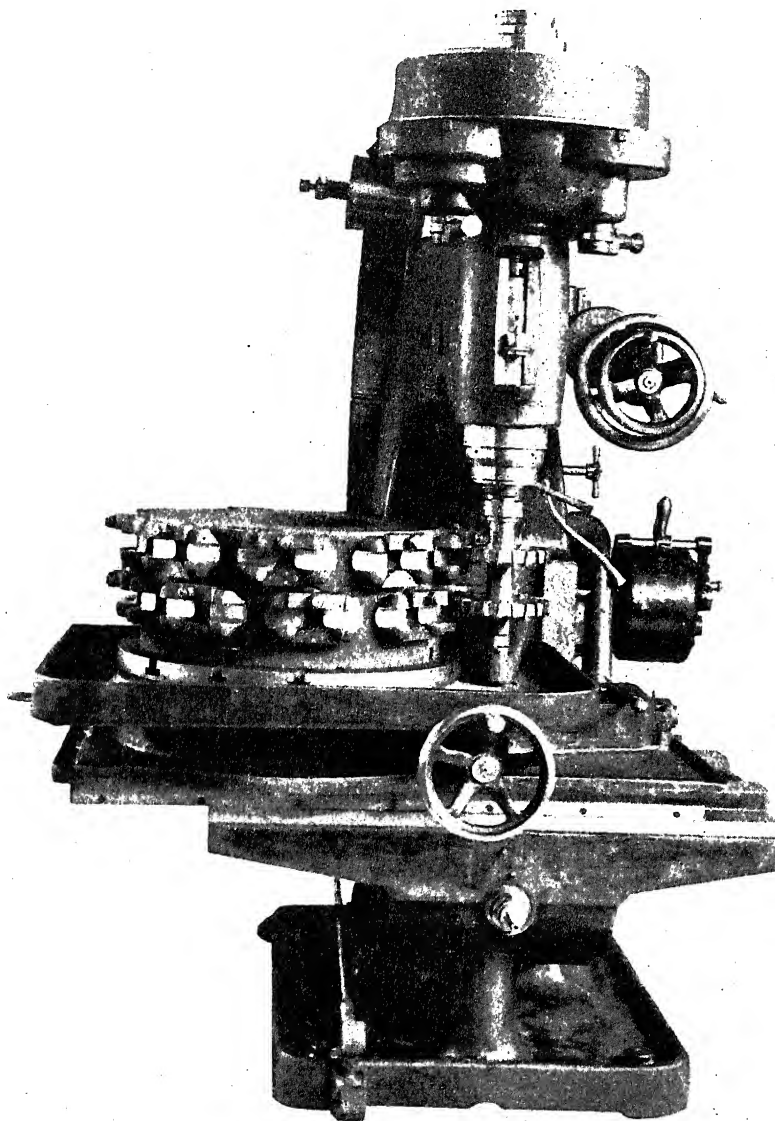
Milling the Inside Faces of Universal Yokes with two Inserted Tooth Cutters (p. 226)
